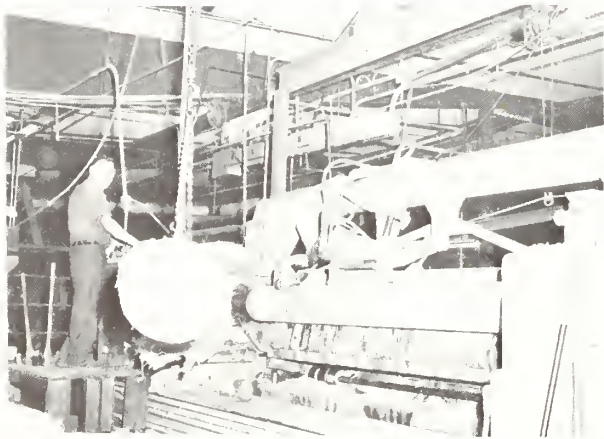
Veneer bolt ready for chucking on rotary lathe.
